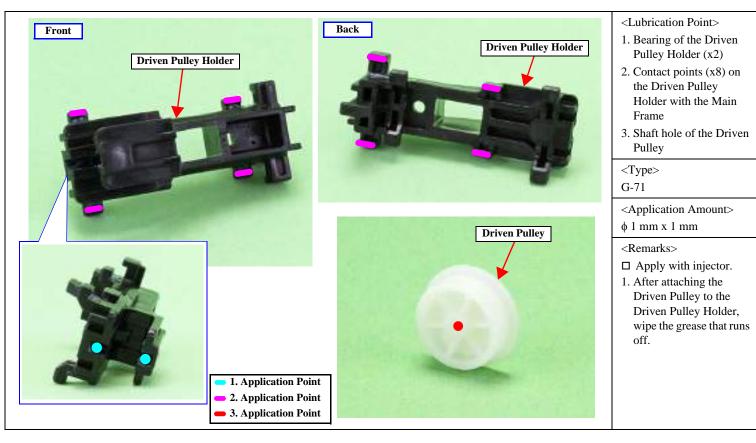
Lubrication of the Driven Pulley / Driven Pulley Holder
